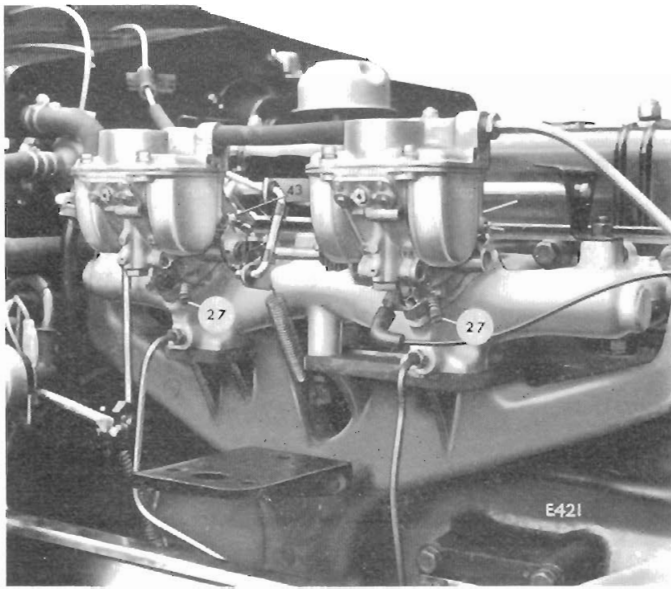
R.H. view of carburetors showing throttle stop screws (43) and mixture control screws (27)
